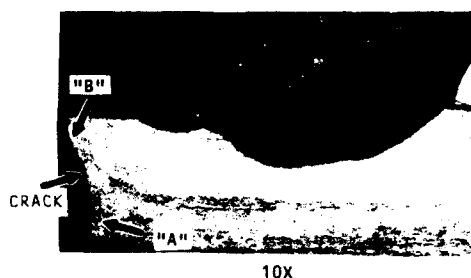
Overall view showing poor weld quality and close proximity of weld to crack
